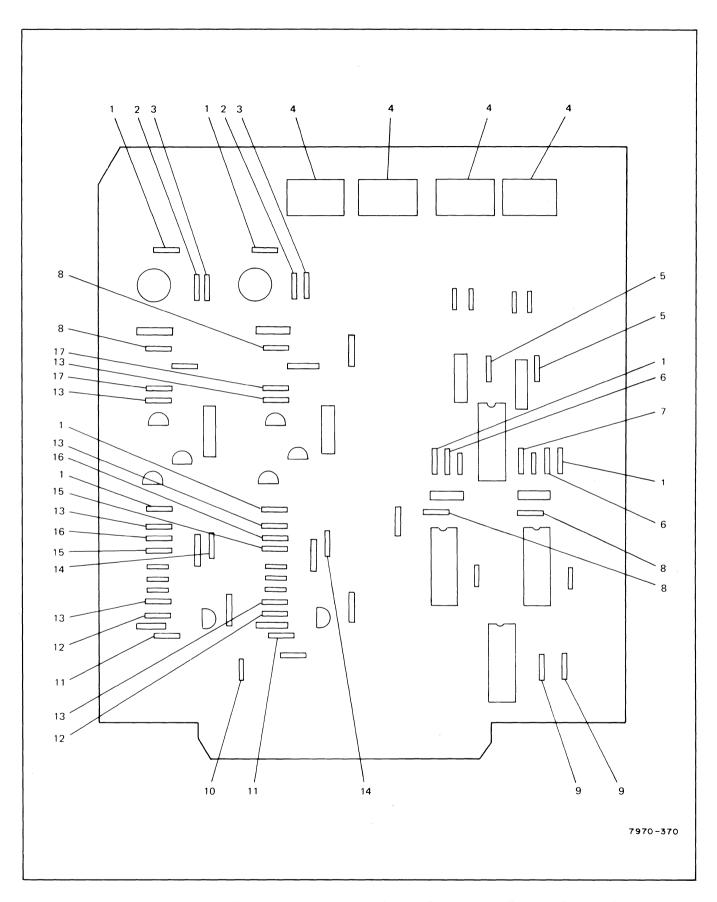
Dual-Channel Read Data Assembly (10 - 20.9 ips), Parts Location Diagram (Sheet 1 of 2)
